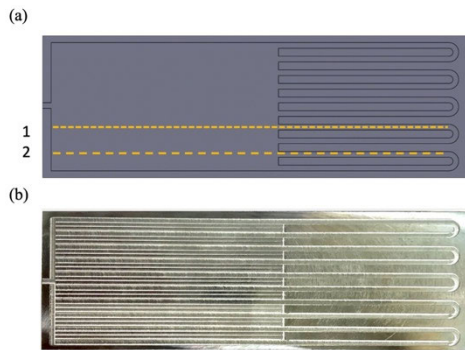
(a) Machining geometry, (b) Machining length and tool path.
